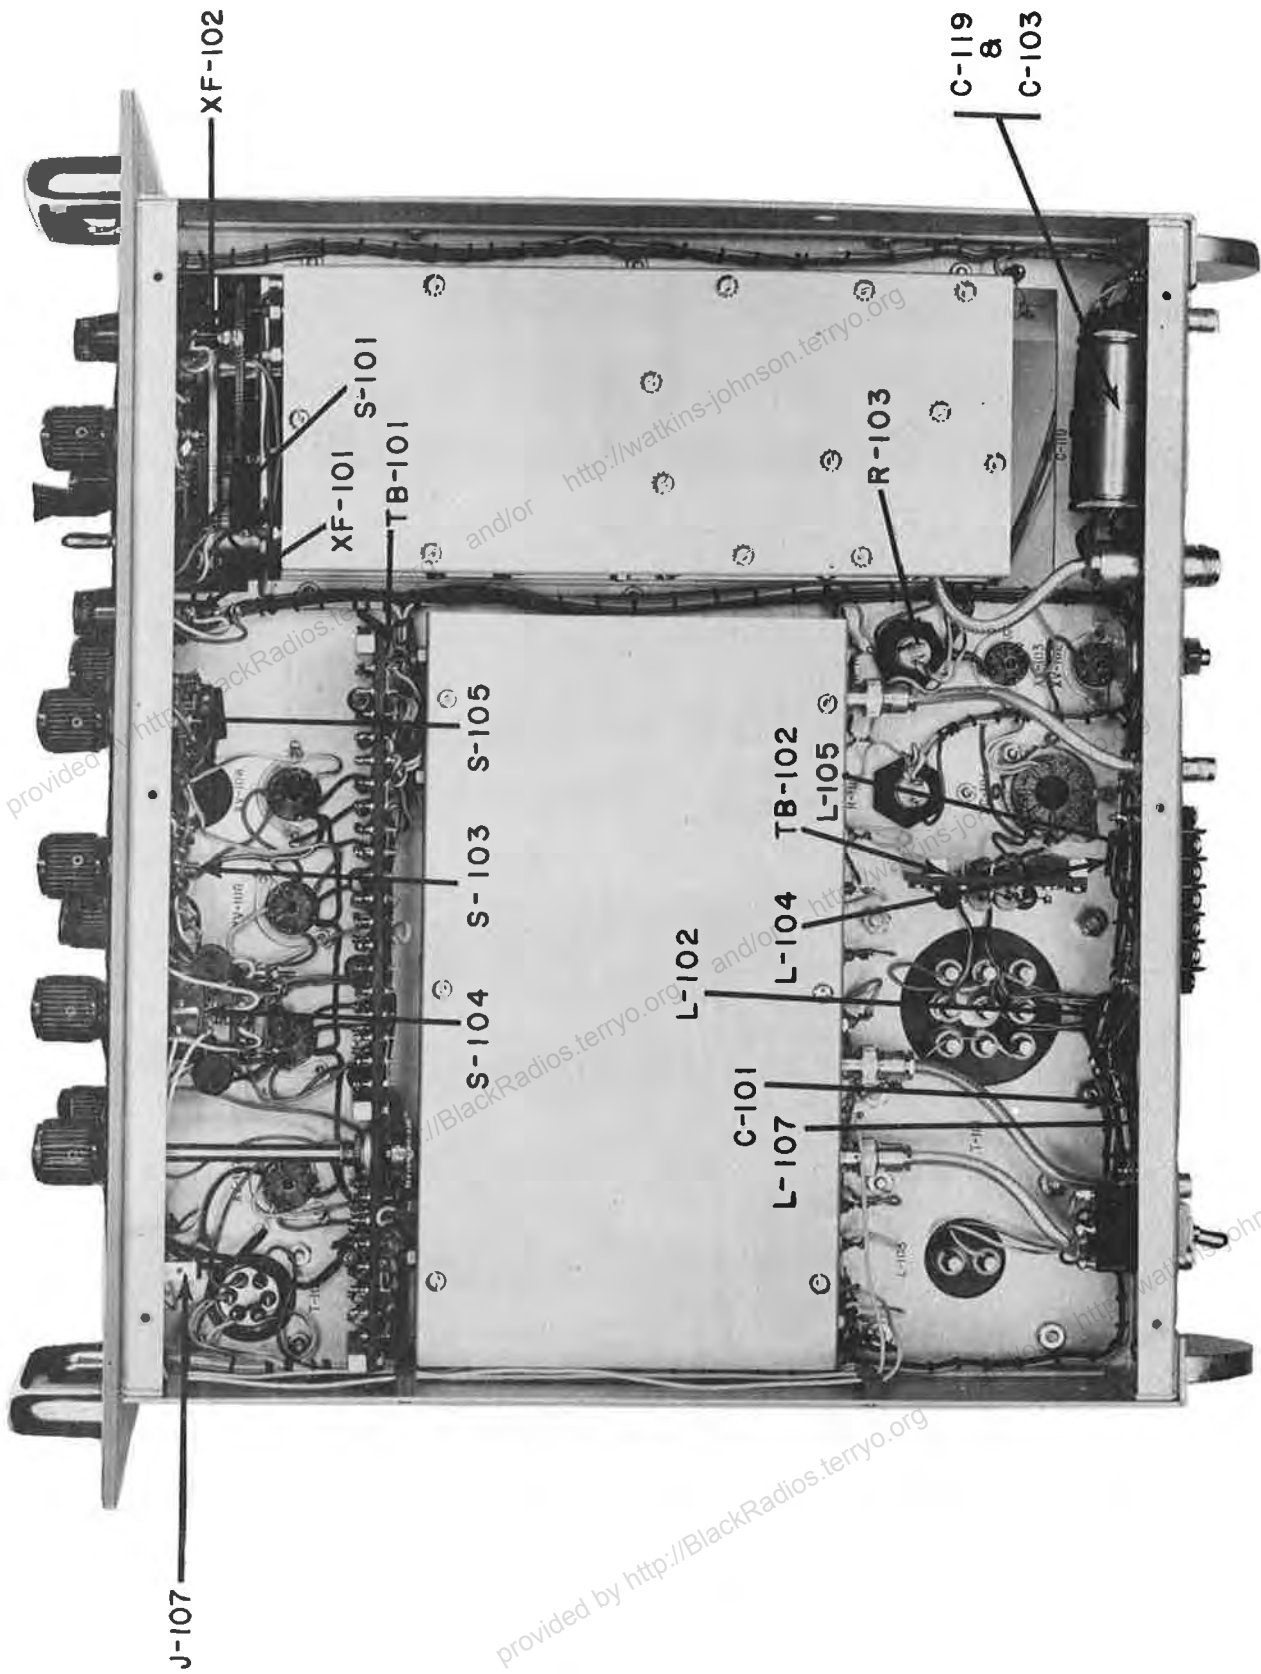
1302-B Receiver, Bottom View, (Dust Cover Removed)
